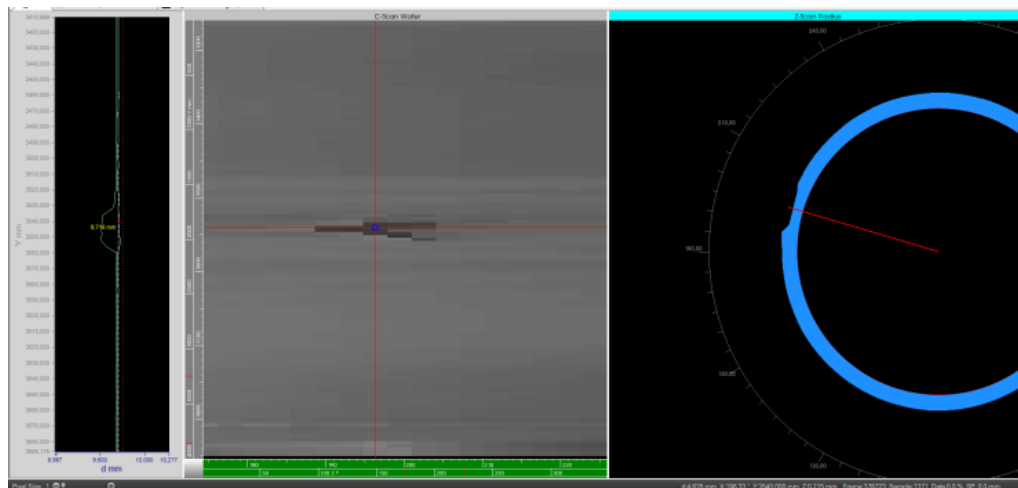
INSPECTVIEW TOOL – IG wear measure
